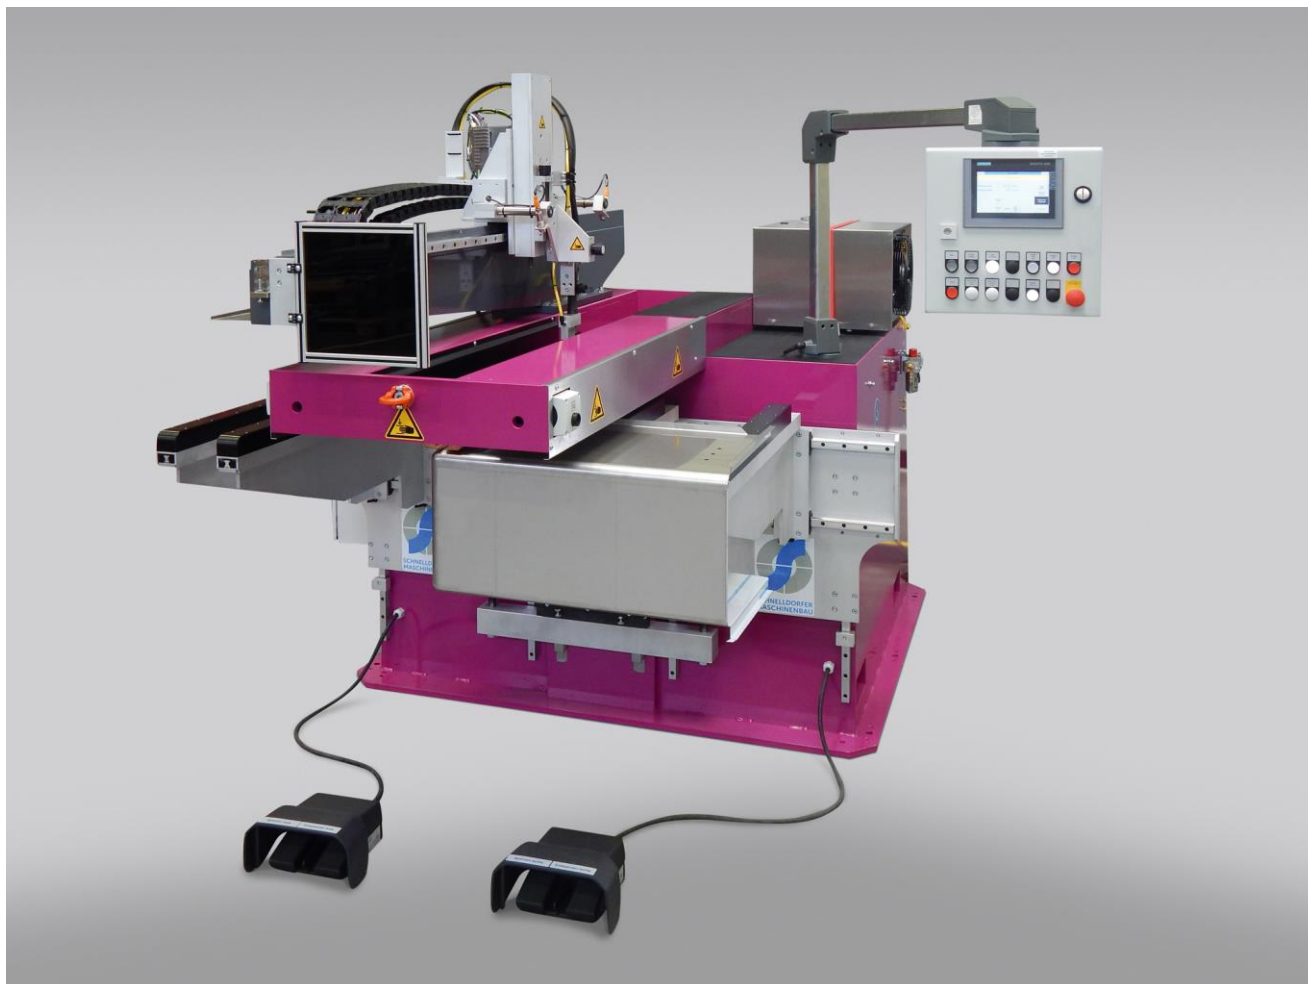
ELENA 800-II-Box with loaded internal box / liner of an H2 rated SS kitchen counter.
